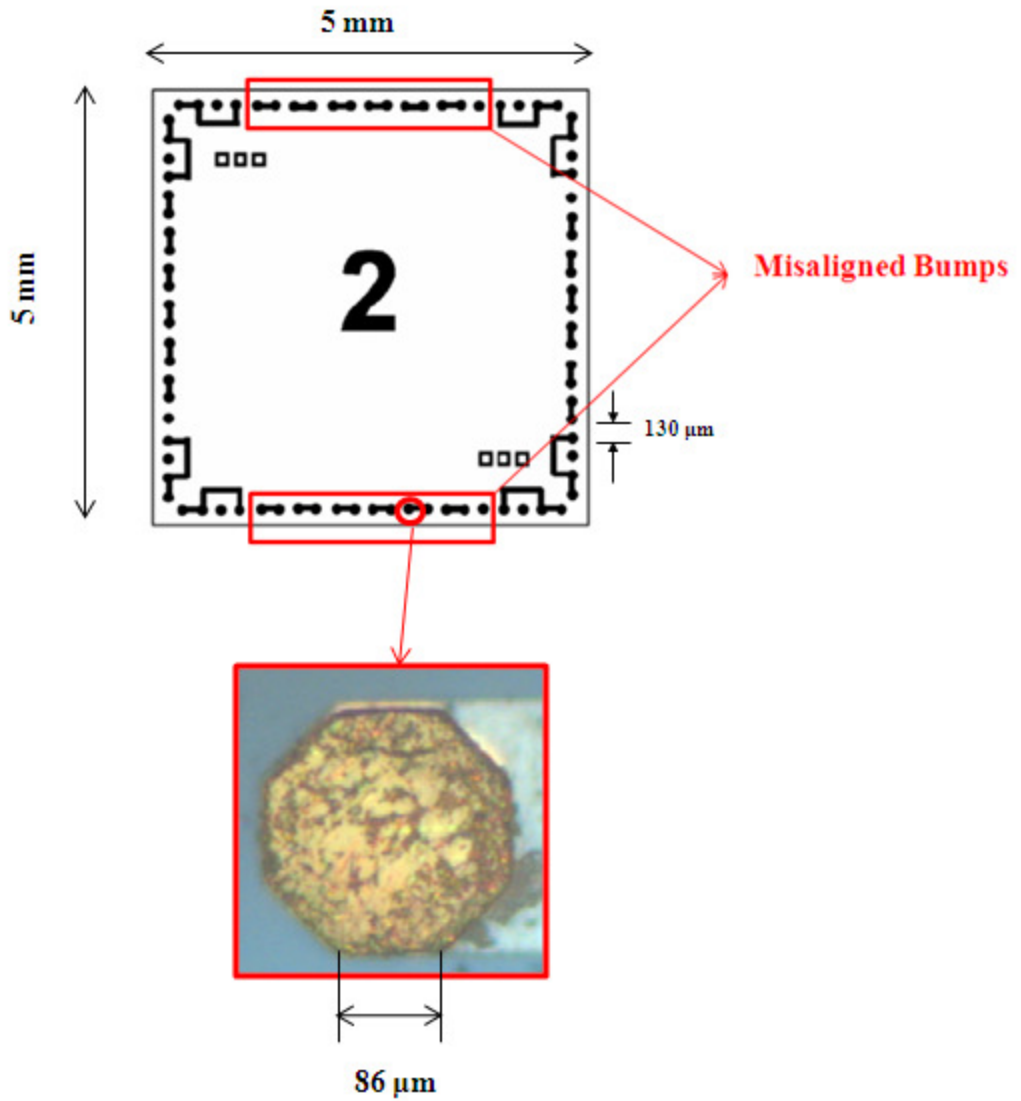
Test Specimens with Dimensions and Bump Alignment Scheme. Joints in the red boxes do not mate with the opposing chip.
